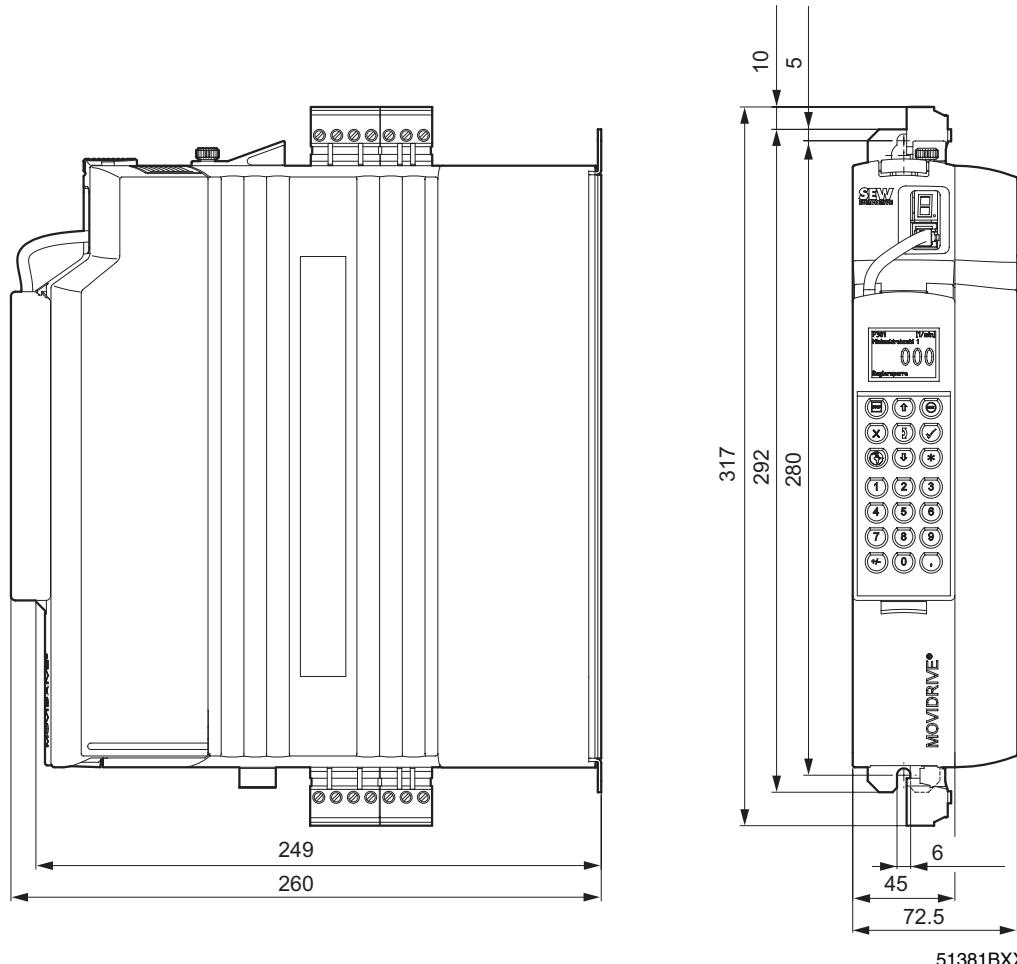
Dimension drawing for MDX61B size 0S, dimensions in mm
